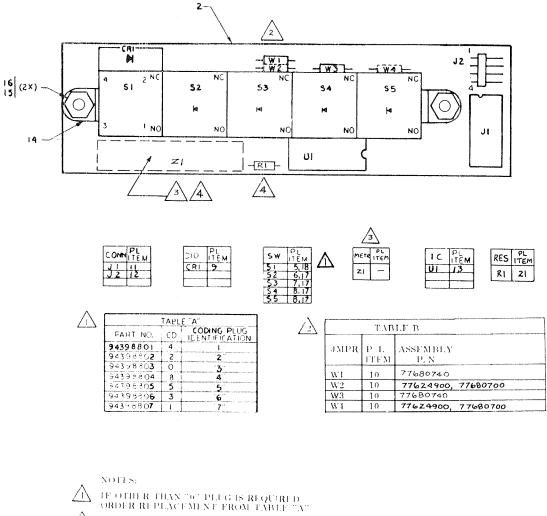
OPERATOR CONTROL CIRCUIT BOARD (SHEET 1 OF 3)
